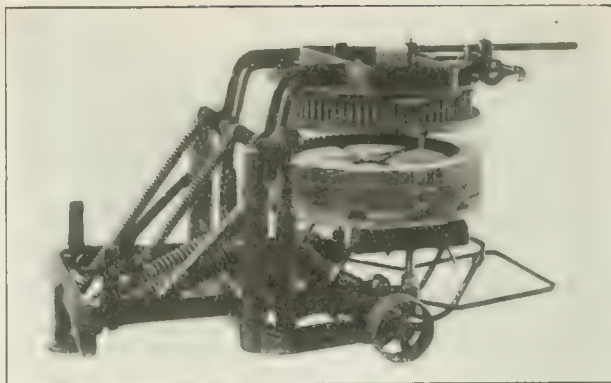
The Draw Completed with Stripping Plate Hanging.
